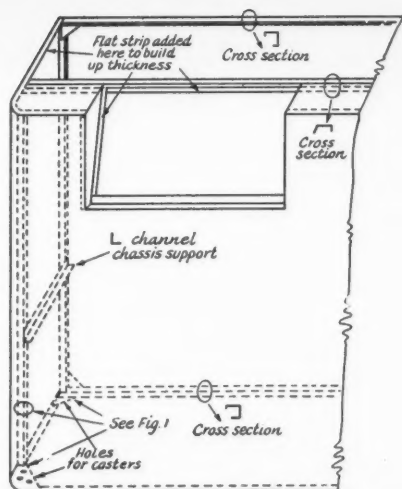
Assembly details of the transmitter console. The pieces are assembled with small rivets and then spot welded.
